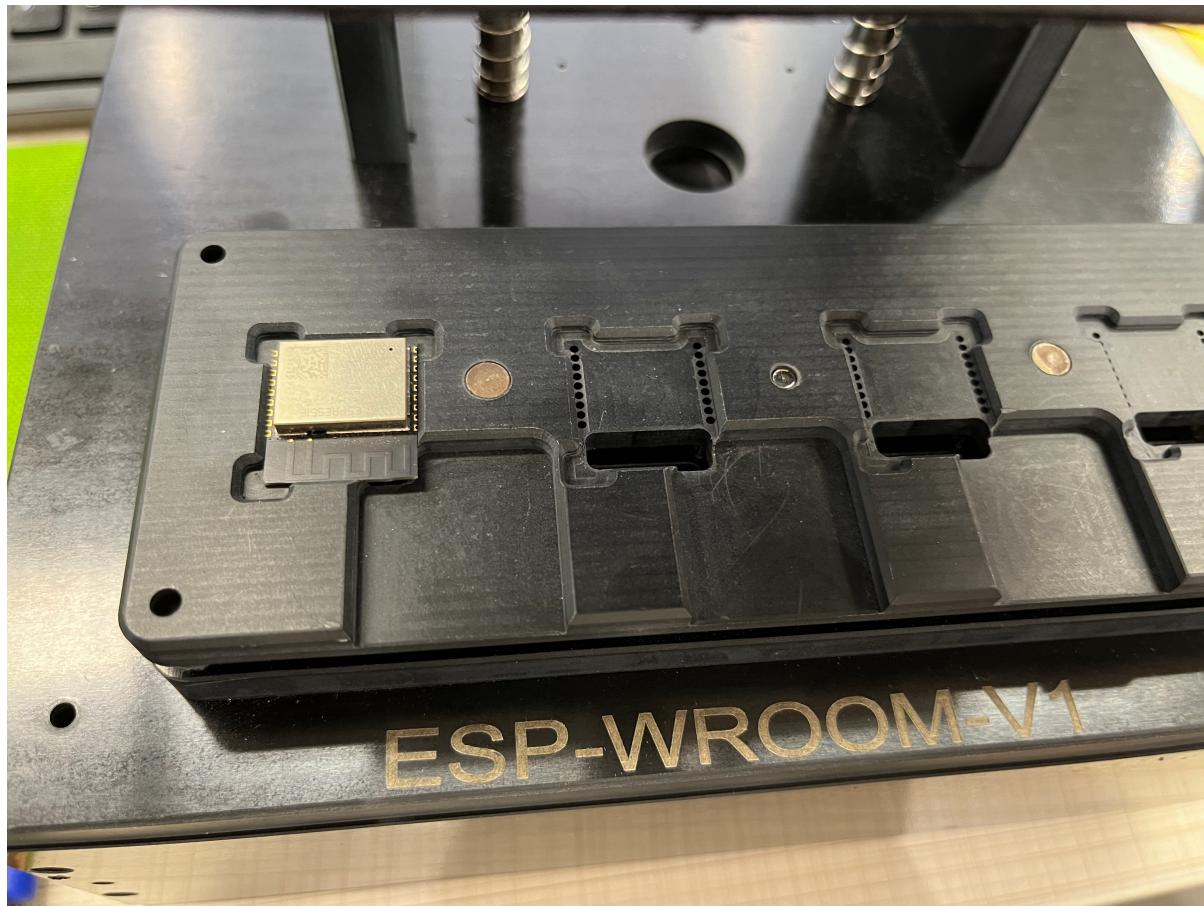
The Mounting Panel for the ESP-WROVER Test Fixture
